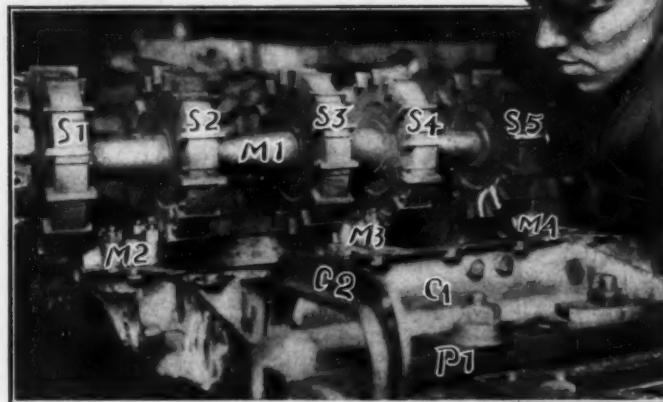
Regal crankcase having main bearings ended off by means of a straddle mill set on a large milling machine
